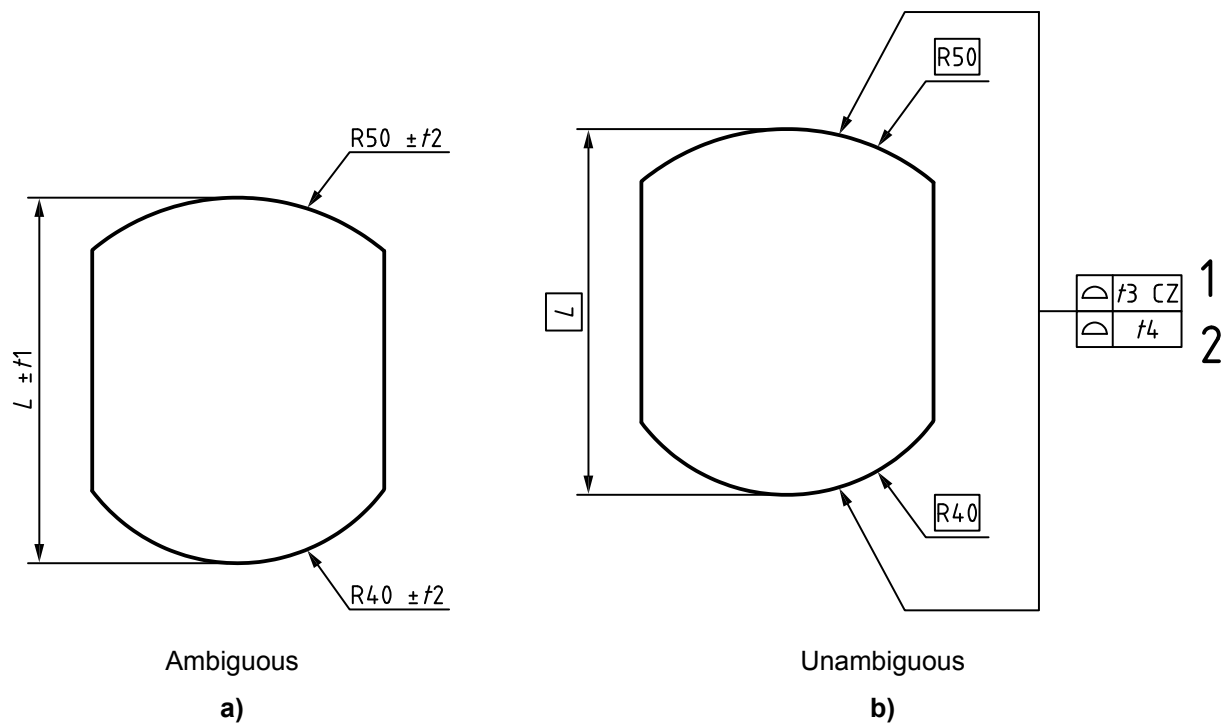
Example of a radius dimension for an integral feature (a) and a solution using geometrical tolerances (b)
